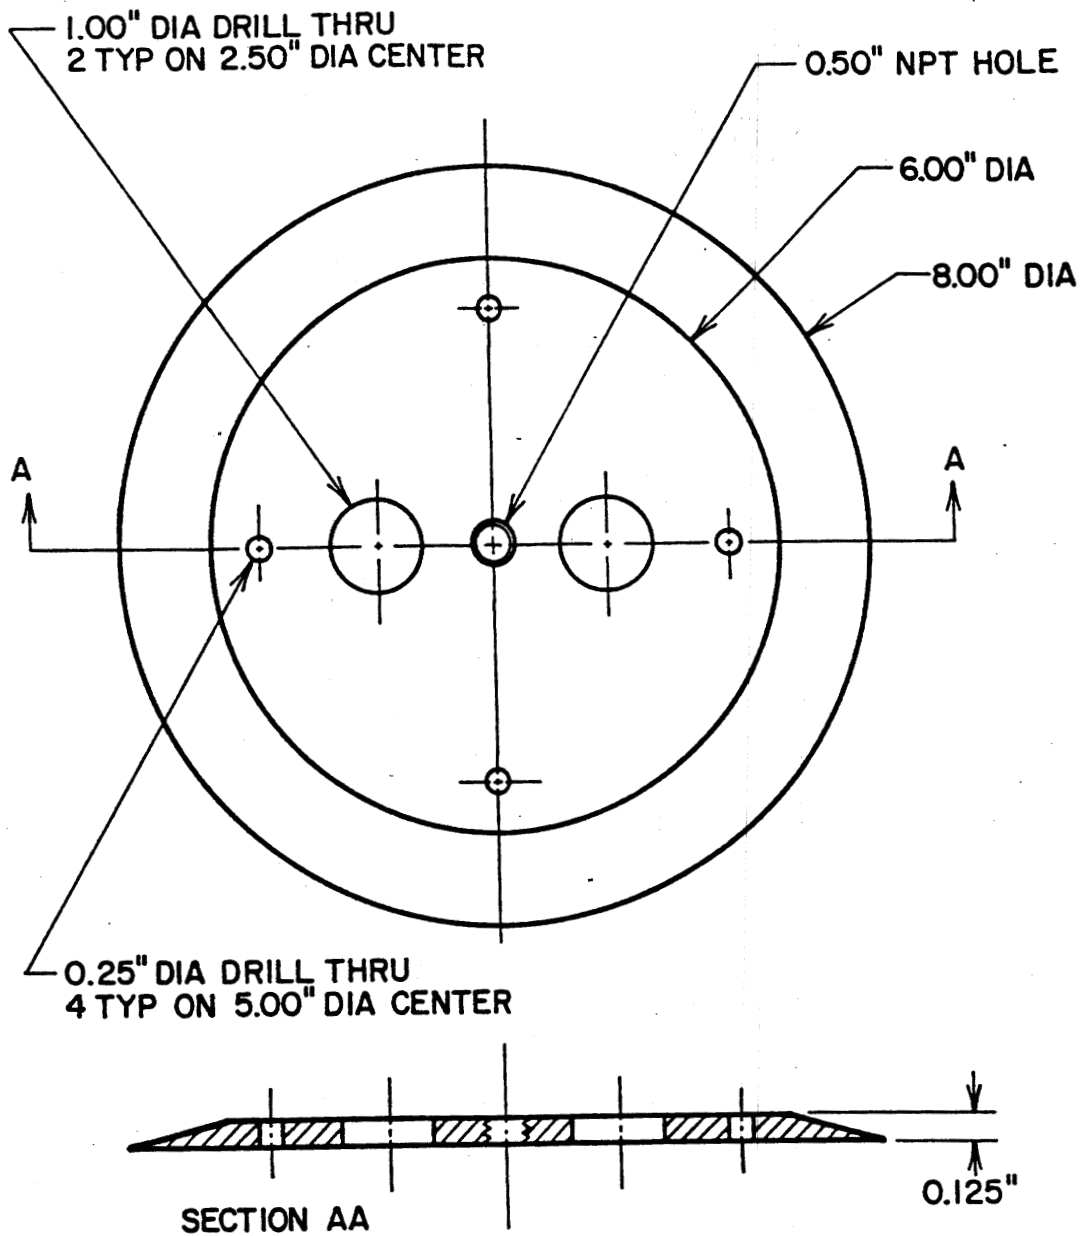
Manufacturing drawings--transducer assembly (sensor anchor).
